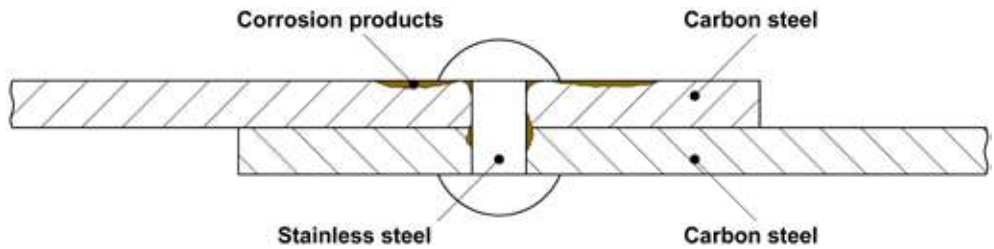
Galvanic corrosion of a carbon steel plate with stainless steel fasteners.
